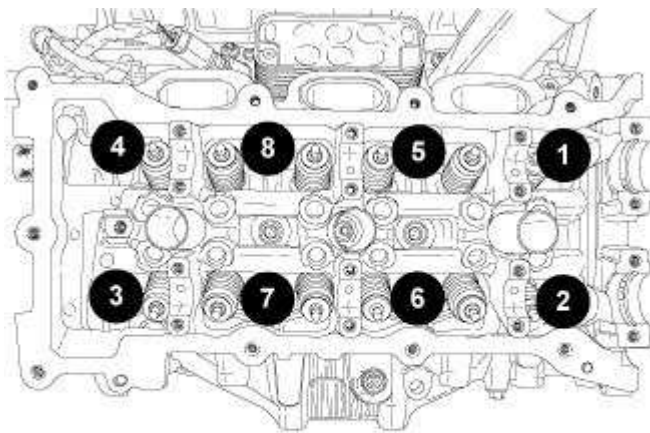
Cylinder Head Retaining Bolt Removal Sequence - Right
